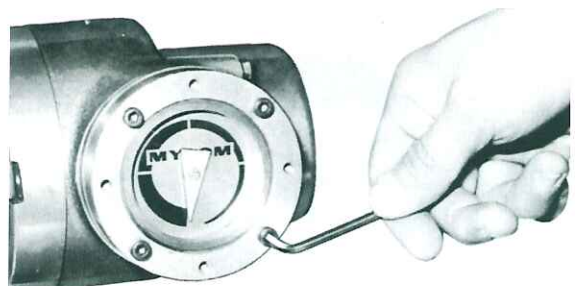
Removing Low-stage side Indicator Cover Clamping Bolt
